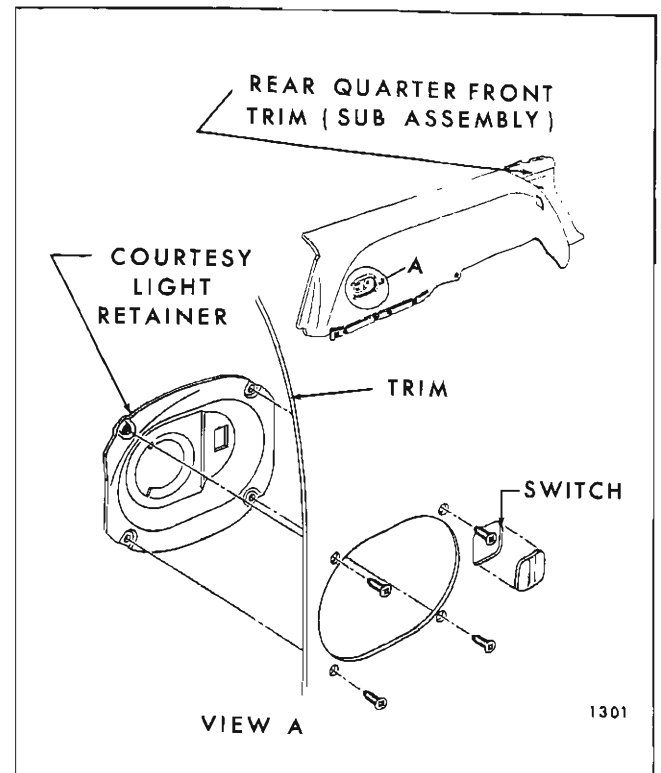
E5—Rear Quarter Inner Trim Panel Assembly
